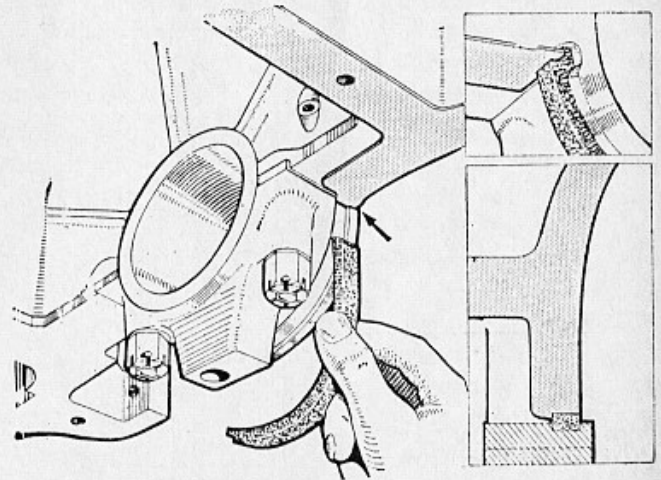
The fitting of the cork sealing strip at the rear bearing is most important to prevent oil leakage. Here the correct method is shown.
